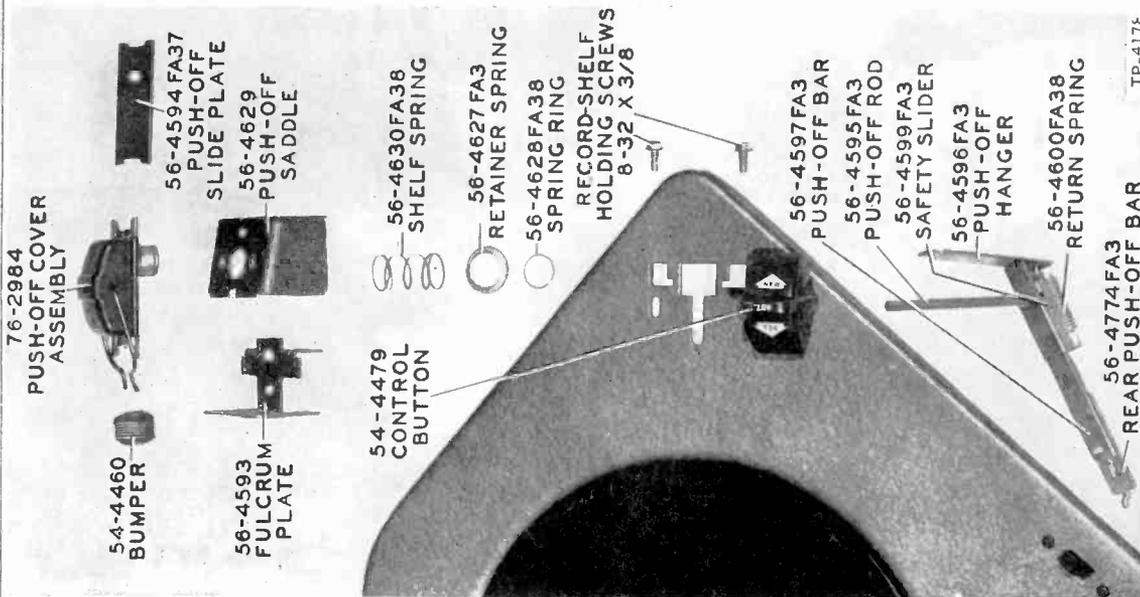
RECORD-SHELF AND PUSH-OFF ASSEMBLIES, REMOVED
